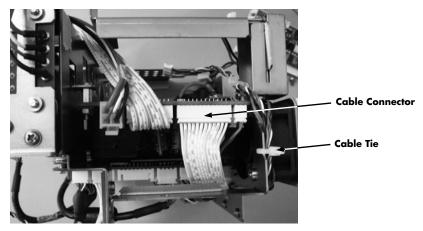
Unplug the Main board cable connector and cut one (1) tie wrap.
